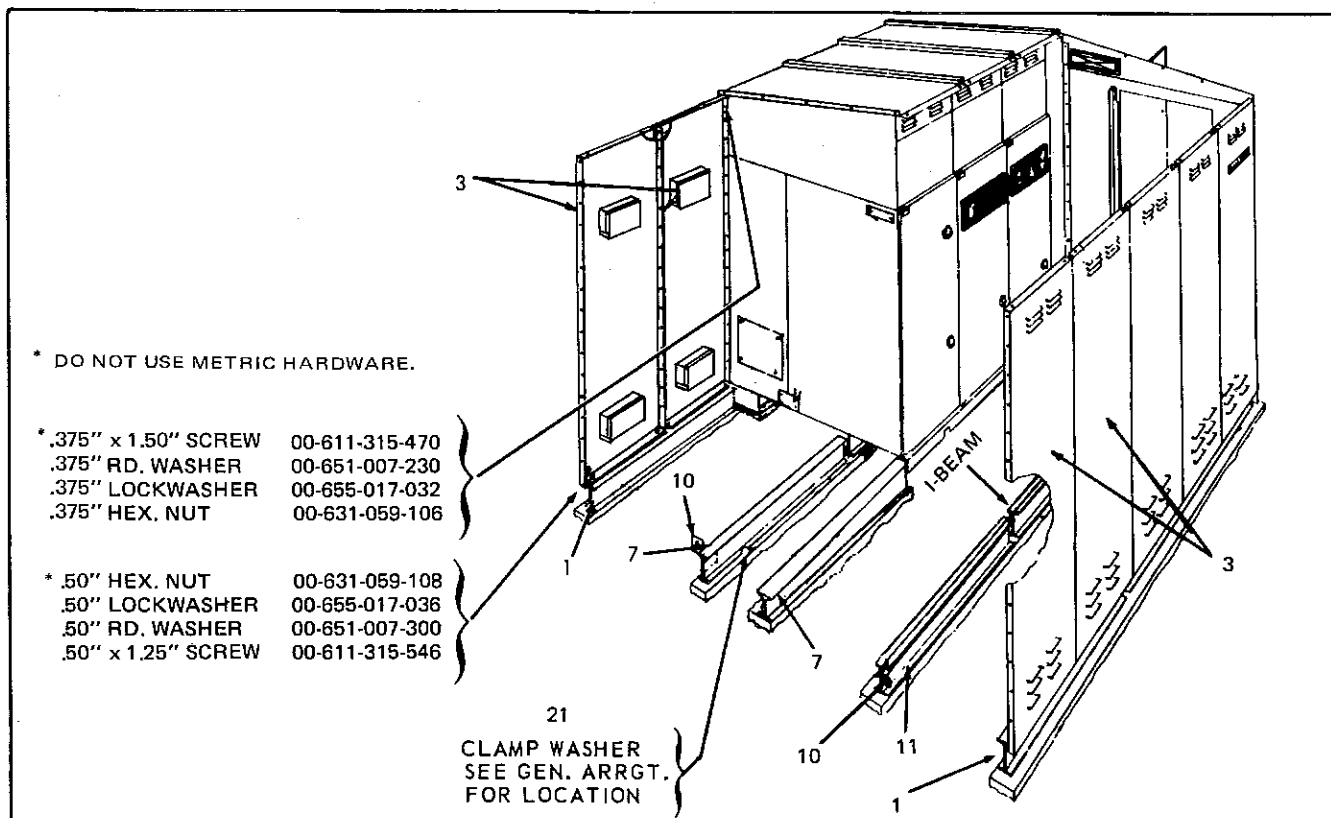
Beam Placement (5 kV) – Single Aisle with Work Space
